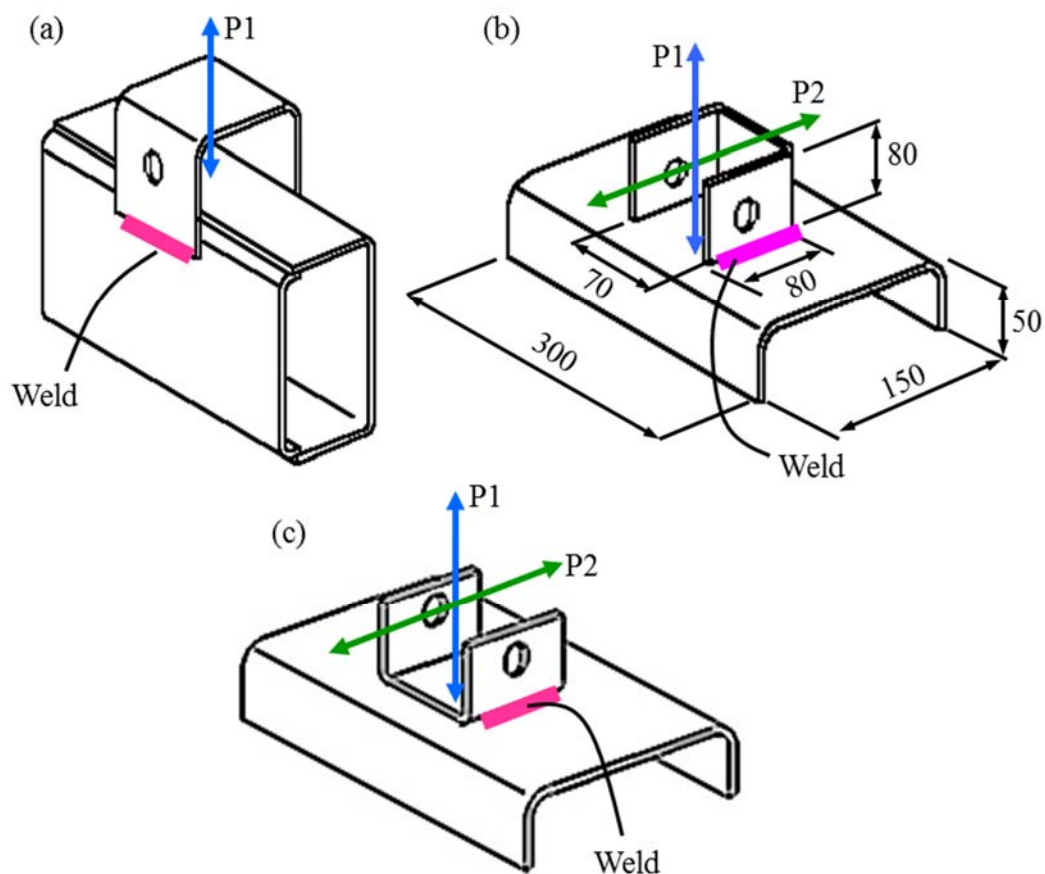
Arc-welded component specimens and loading directions. (a) Lap-joint, (b) T-joint, (c) flare-joint.
